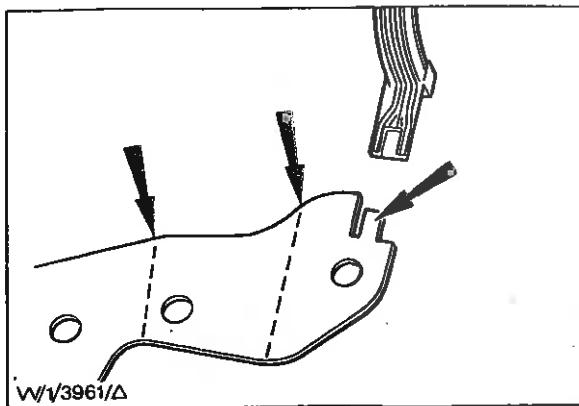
Oil Pan Front Seal and Gasket Installation -
